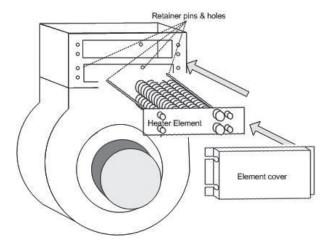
With Collar removed insert heater element(s) (one shown in this diagram), wires not shown in diagram.
